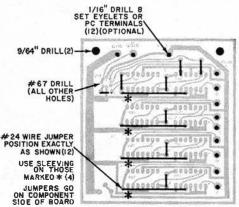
After drilling the PC board, install the 12 jumpers on the component side in positions shown.
